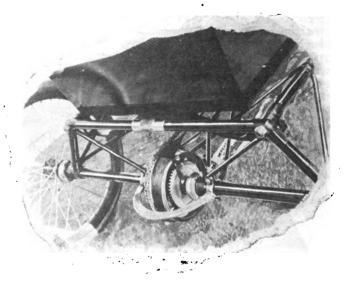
STANLEY STEAM CARRIAGE. VIEW OF REAR AXLE, SHOWING REAR OF FRAME, CHAIN WHEEL, AND BRAKE DOWN.
